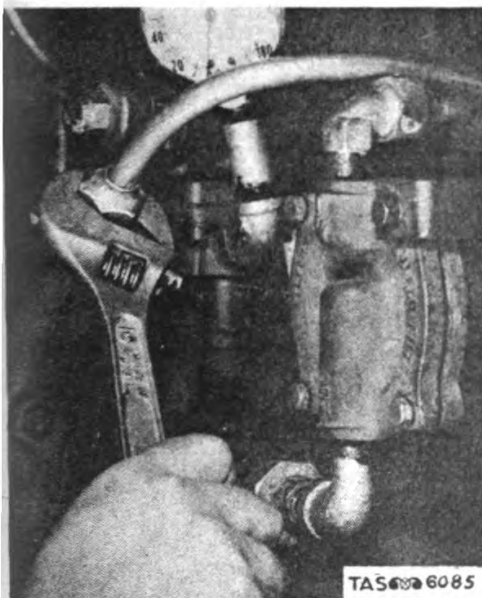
Loosening Adapter Nut and Elbow and Disconnecting Return Line Near Top of Pressure Regulating Valve.
